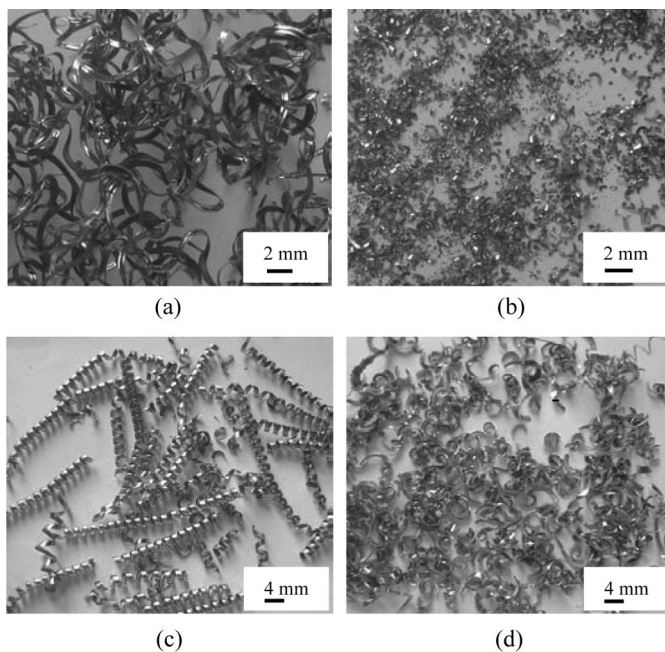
(a) Without using the developed chip breaker; (b) with the developed chip breaker.
